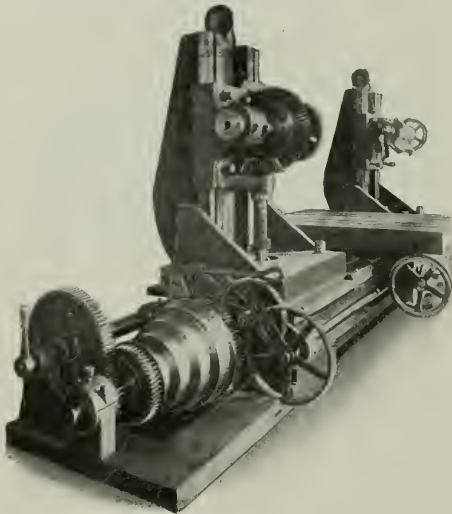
Driving Mechanism of New Haven Boring Machine.
